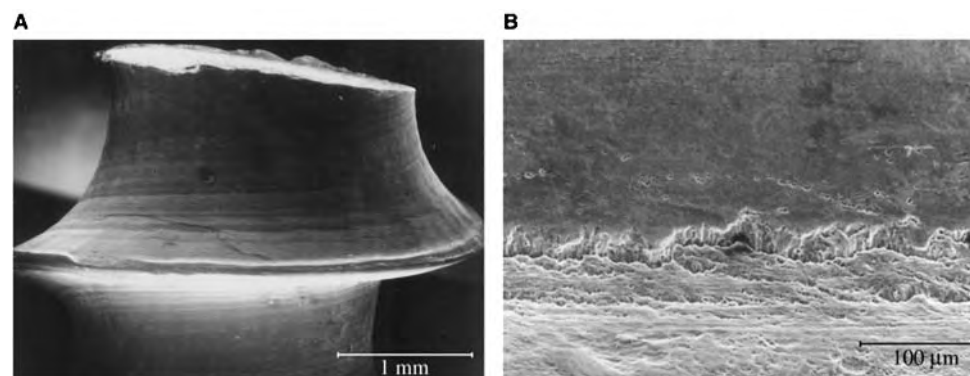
(A) Cracking in screw thread below fracture surface and (B) higher magnification of crack showing crack interface.
